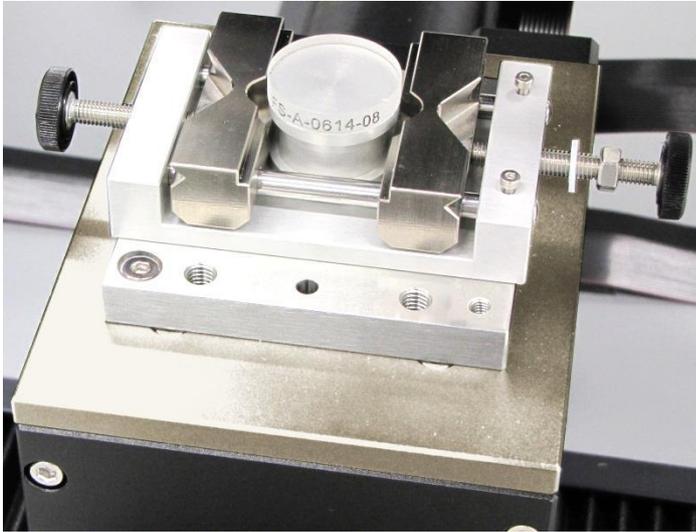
Fused Silica sample/stud solidly mounted in universal sample holder
